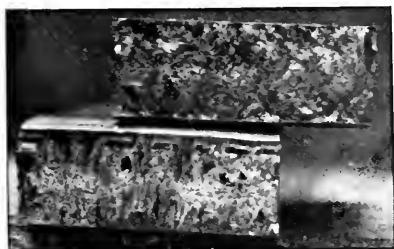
Shear Fracture of Aluminium Alloy (No. 4).
